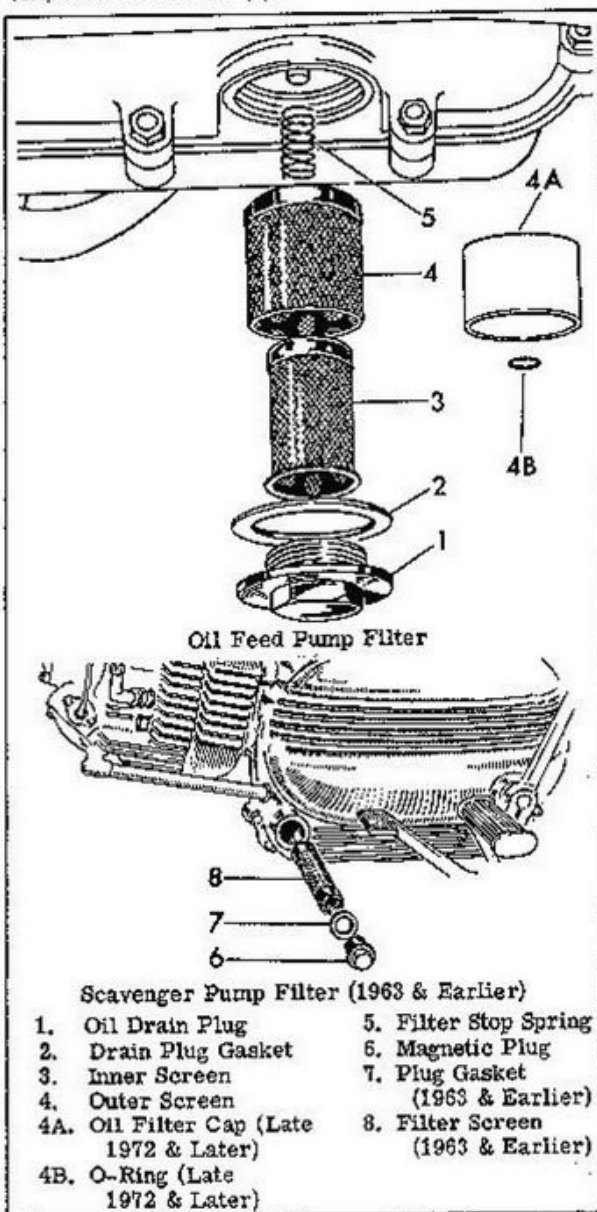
A-12. Oil Feed and Scavenger Pump Filters
